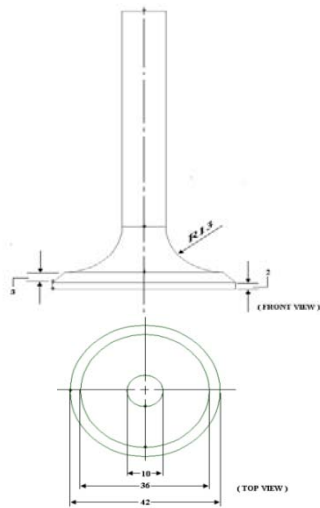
Dimensions of Poppet intake valve (All dimensions are in mm)
